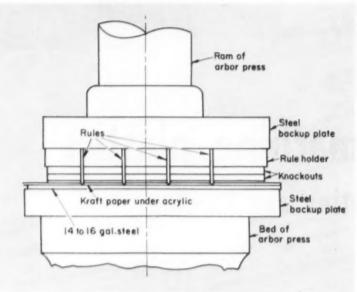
(left) Rule die set up for stamping aerylic plastic. The plastic will go between the 3/16-inch sponge-rubber knockouts and the kraft paper. The rules are %-inch double-bevel standard hardened stock. The rule holder is jig sawed in hard wood or pressed wood.
